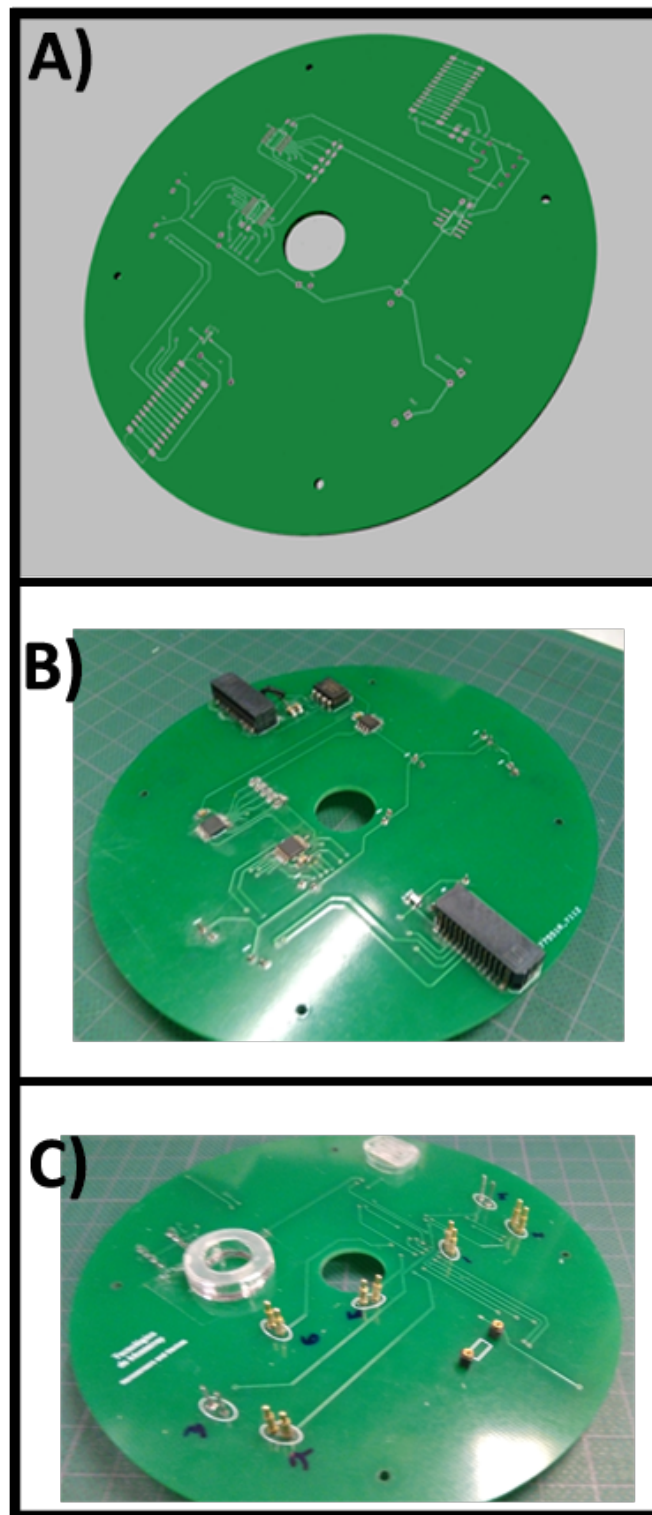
Photos and illustration of the PCB board for Phase 2 CD. A) Illustration obtained in Diptrace emulating the copper pathways in top view. B) Photos (Top and Bottom view) of the fabricated PCB board.
